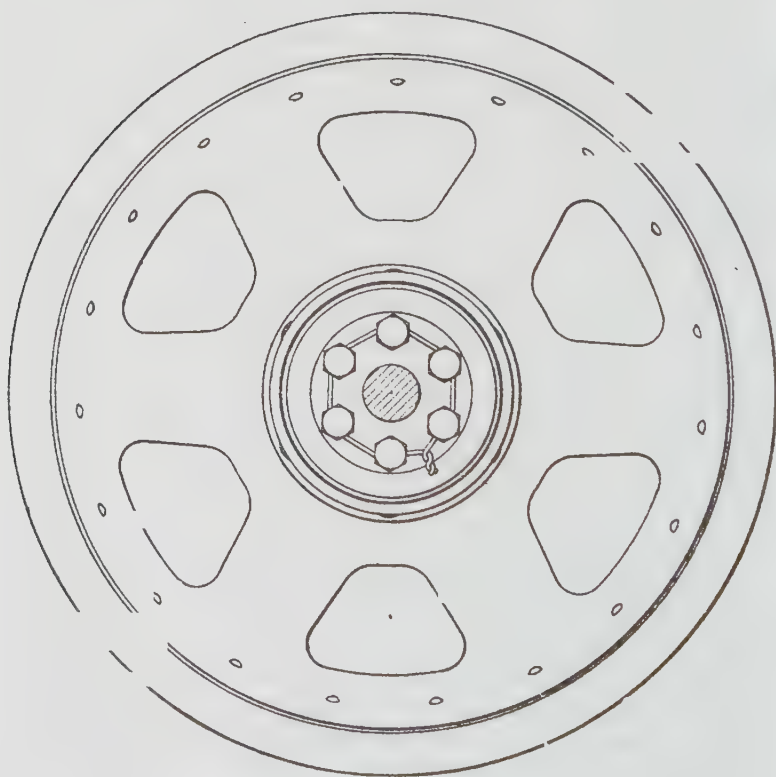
TYPICAL CONE CLUTCH DESIGN.
